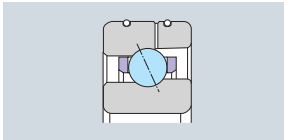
Ultra-high-speed angular contact ball bearings
